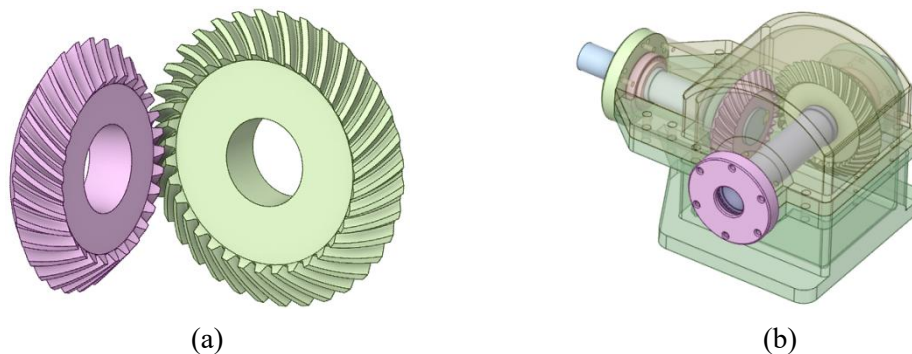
3D model of helicopter tail reducer: (a) Gear assembly; (b) Gear reducer assembly
